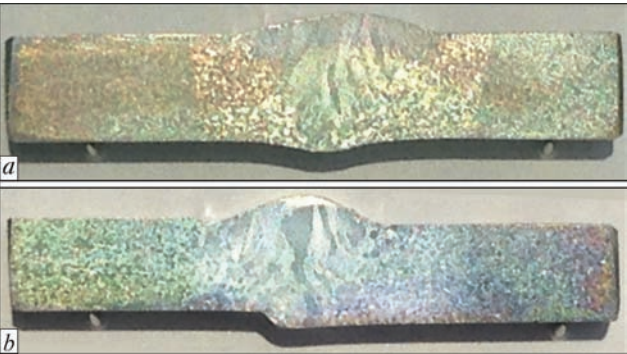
Type of TIG-welded joints of alloy Ti-6.5Al-3Mo-2.5V-4Nb-1Cr-1Fe-2.5Zr: *a* — to edge groove; *b* — without edge preparation with feeding of filler wire VT1-00sv
